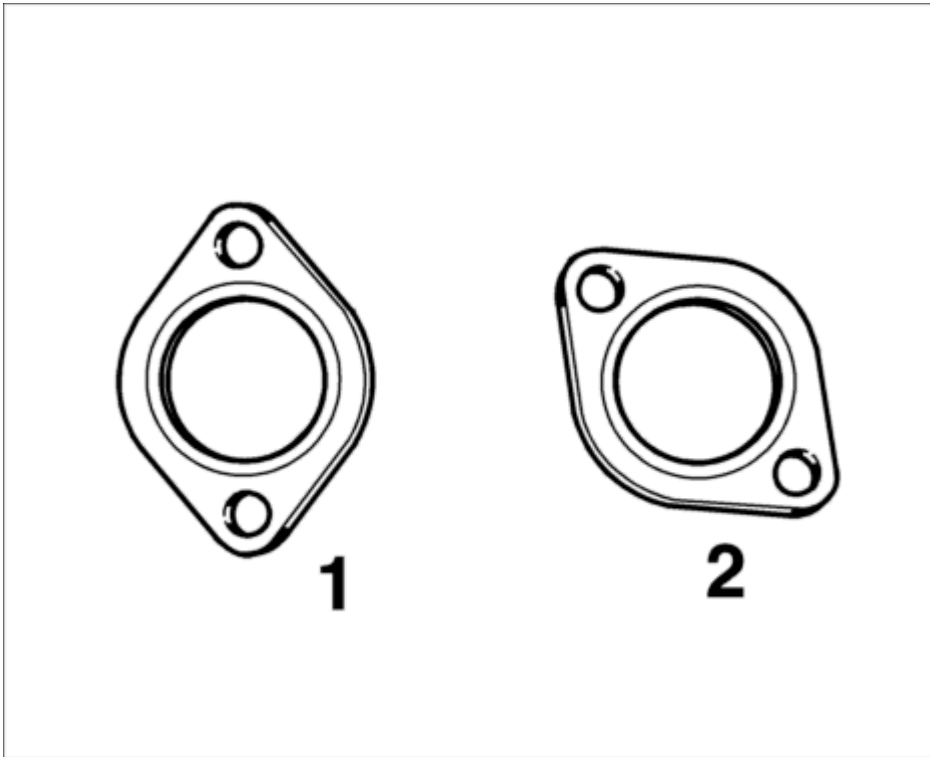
Installation position for solenoid hydraulic valve retainer plates
